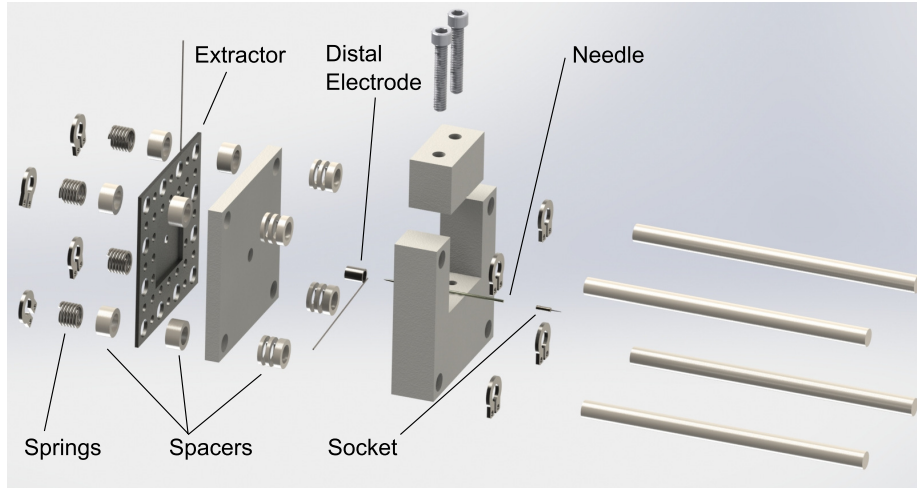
Exploded view of the solid needle emitter experimental setup. The distal electrode in this configuration is a stainless steel cylinder connected with a steel wire.
